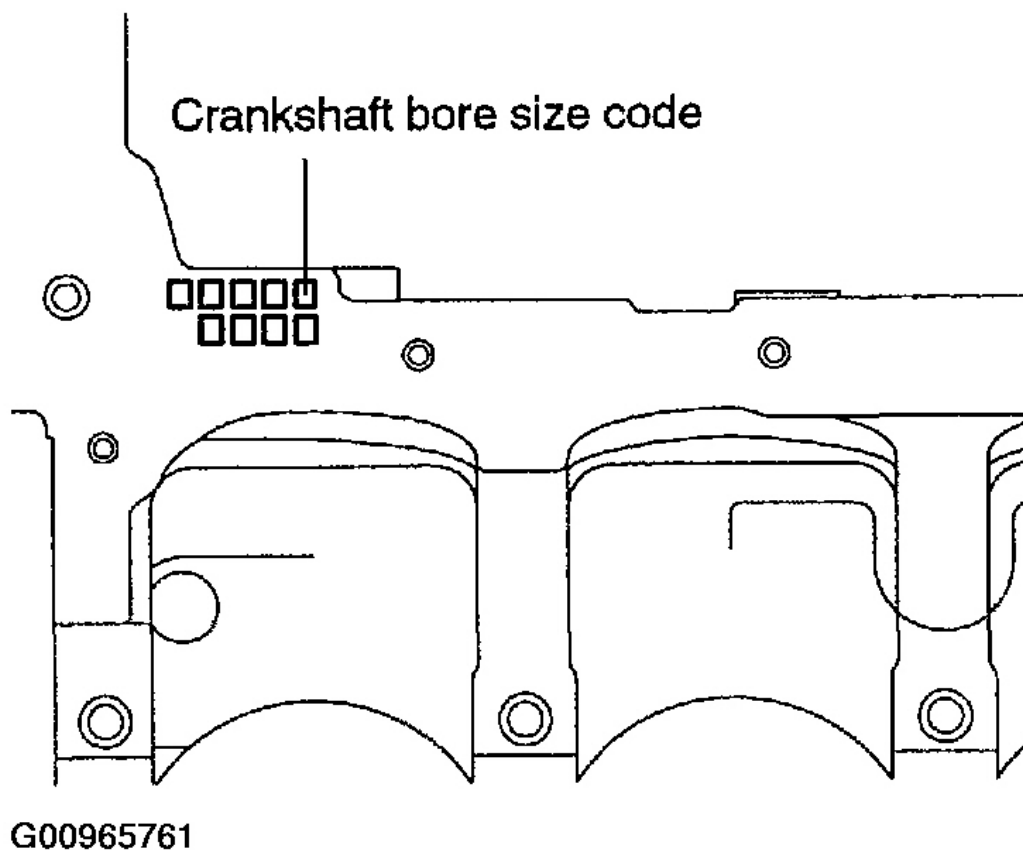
Identifying Cylinder Block Crankshaft Bore Size Code
